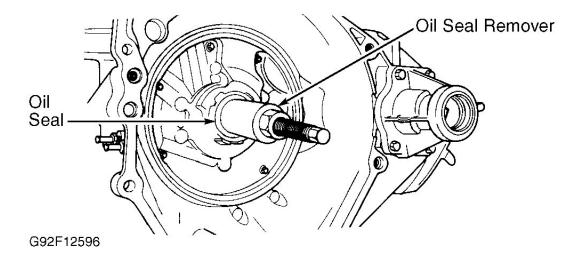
Removing Oil Seal From Oil Pump Courtesy of CHRYSLER CORP.
